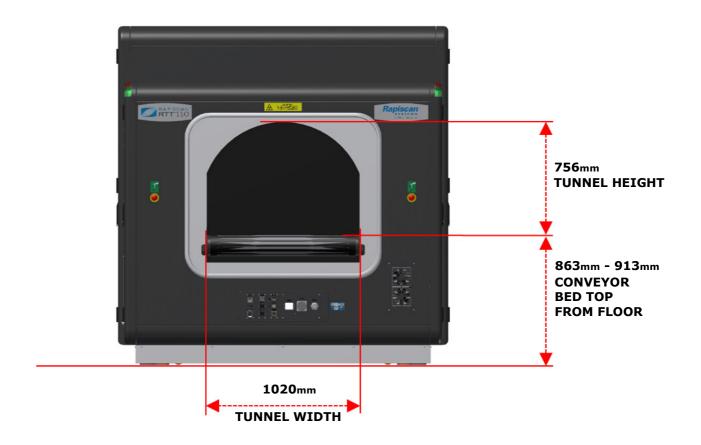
RTT®110 - Entry and Exit Section dimensions (Entry section illustrated)
